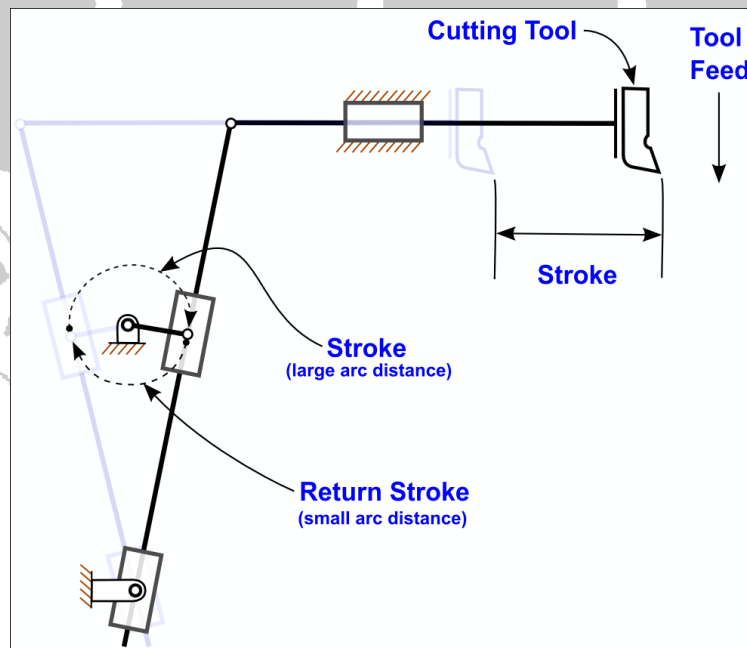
Schematic of the quick return mechanism used in shaper machine
